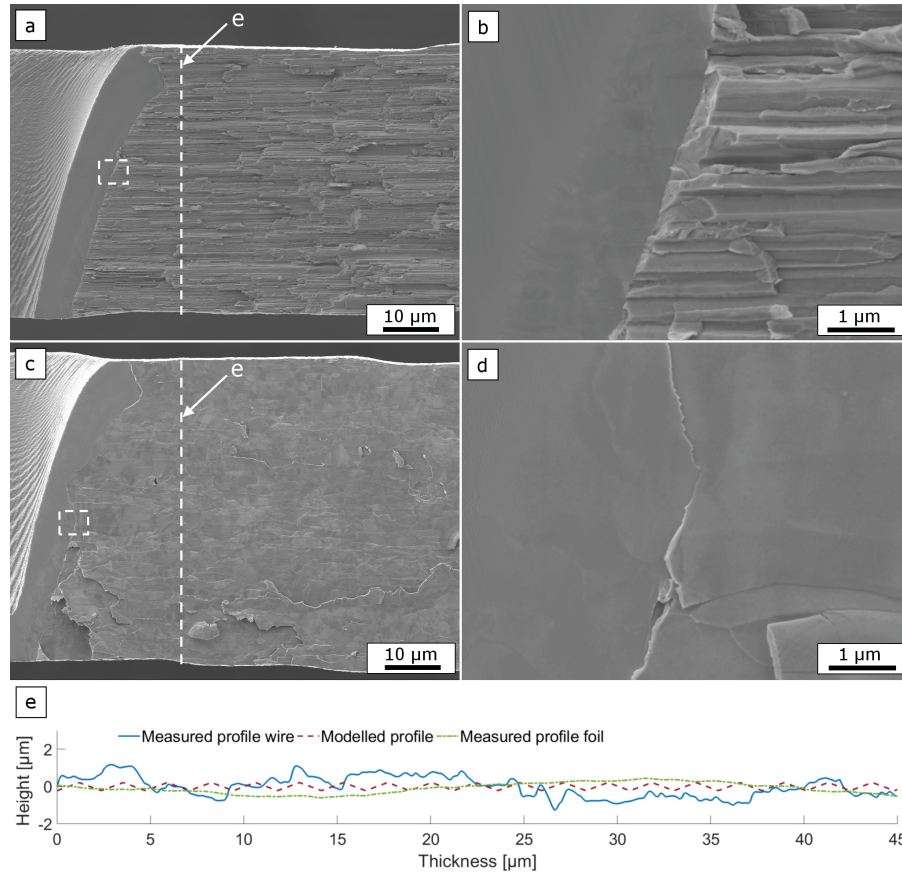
Fracture surfaces of a wire sample (a) and a foil sample (c). (b) and (d) show a magnification of the dashed rectangles in (a) and (c). The surface morphology of the fracture surfaces strongly differs between the two materials. The wires show a rough, jagged structure, whereas the foil samples show a flat "pancake"-like structure. (e) The continuous and the dot and dash line display the profiles of the fracture surfaces measured using a CSLM along the dashed lines indicated in (a) and (c). The dashed line shows the simplified rough surface profile used for the FE modelling described in Sec. C.4.1.
